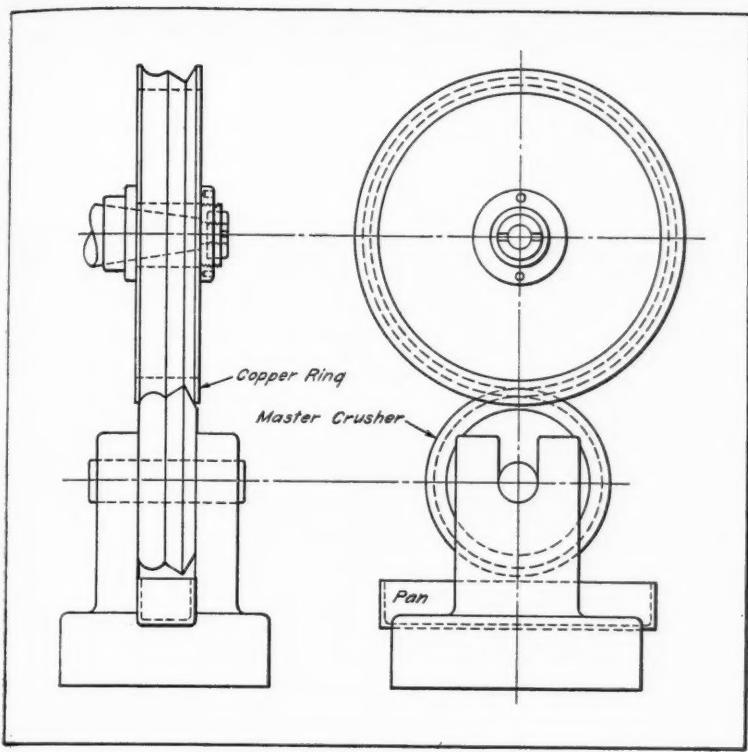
A master crusher having the exact form of required tool is used to produce a formed wheel made of a diamond-impregnated disc
